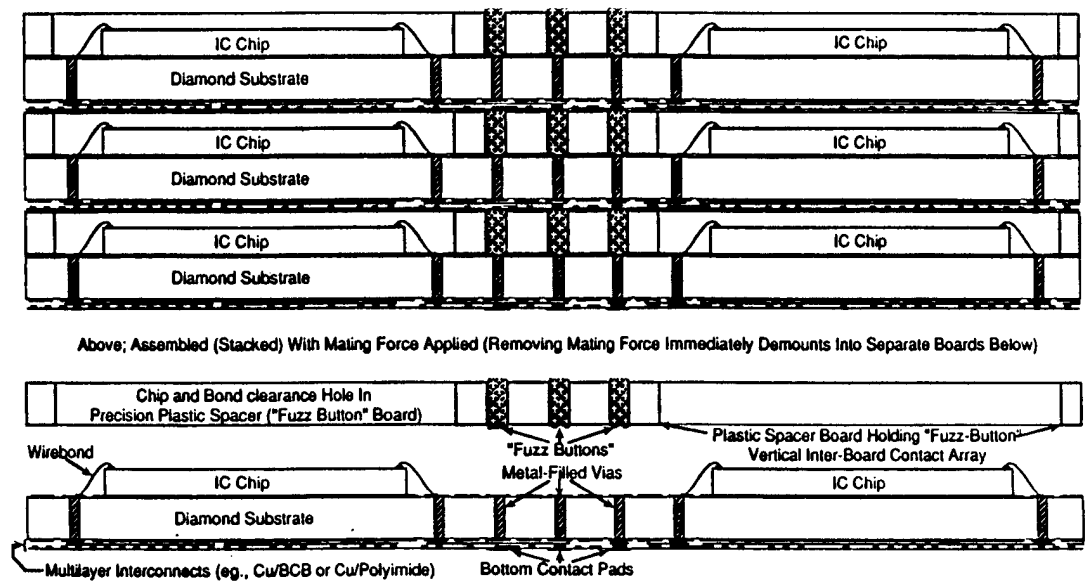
Cross Section of 3-D Diamond MCM Assembly
